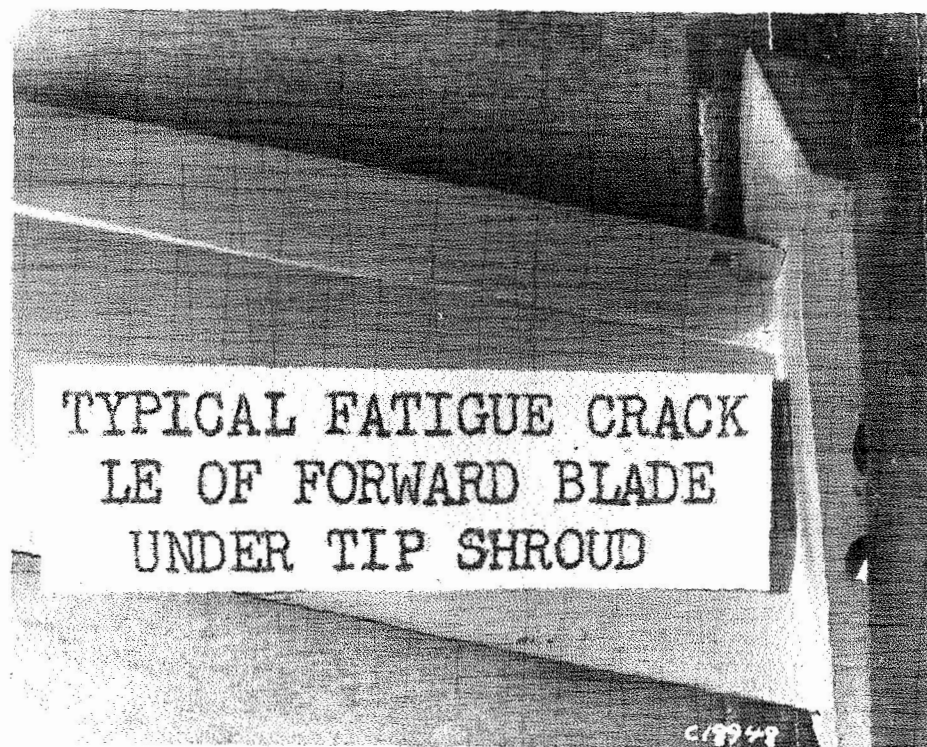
Fatigue Endurance Test Blade Failure,
